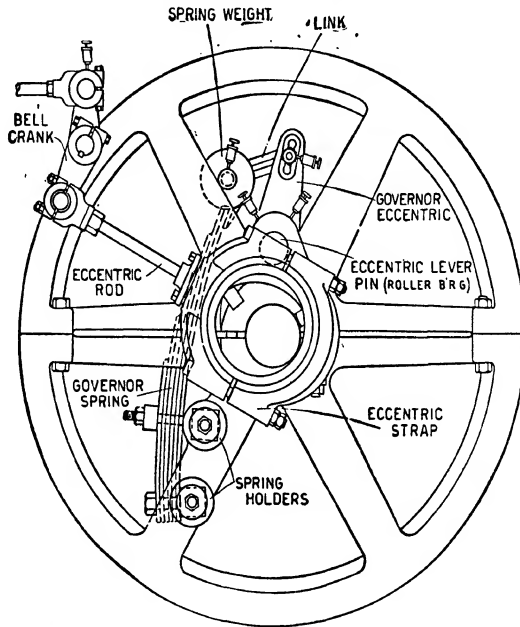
Shaft-type governor. The rotation of the flywheel creates a centrifugal force that causes the spring weight to move outward against the tension of a spring. This movement is transmitted to the outer end of an eccentric lever, which is free to oscillate about a pin located on the flywheel. The inner end of the lever carries the steam-valve eccentric, which is free of the shaft. As the spring weight changes position, it alters the position of the eccentric, and thus changes the cut-off. This is more complicated but more efficient than a throttle-type governor. (Courtesy Socony-Vacuum Oil Co.)
